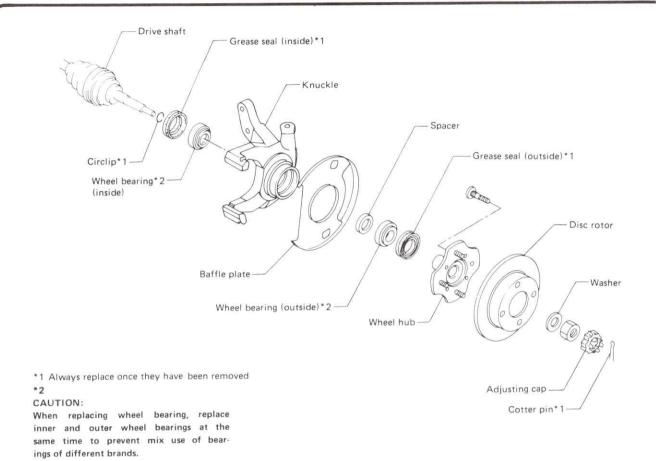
Exploded view of front wheel hub and knuckle (Sec 5)
